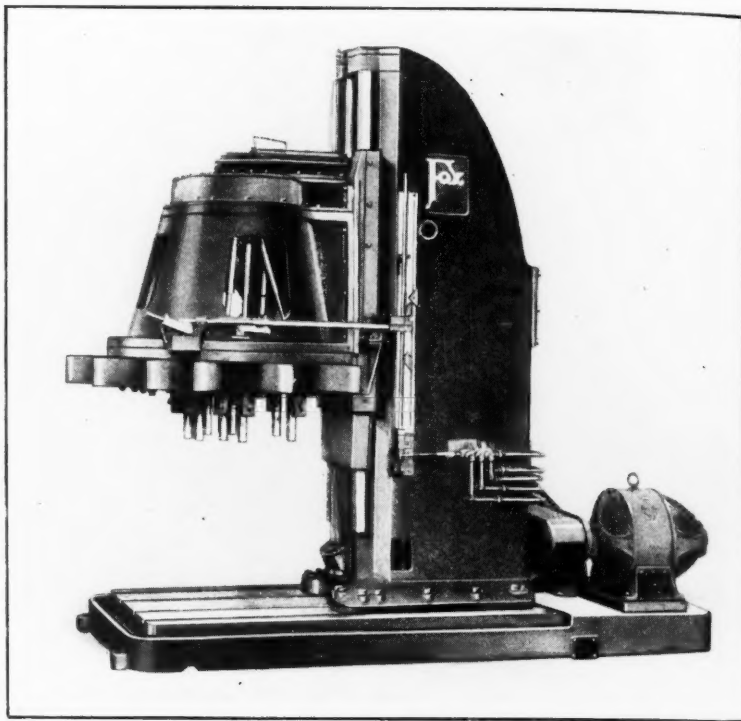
Fox Heavy-duty Multiple-spindle Drilling Machine
